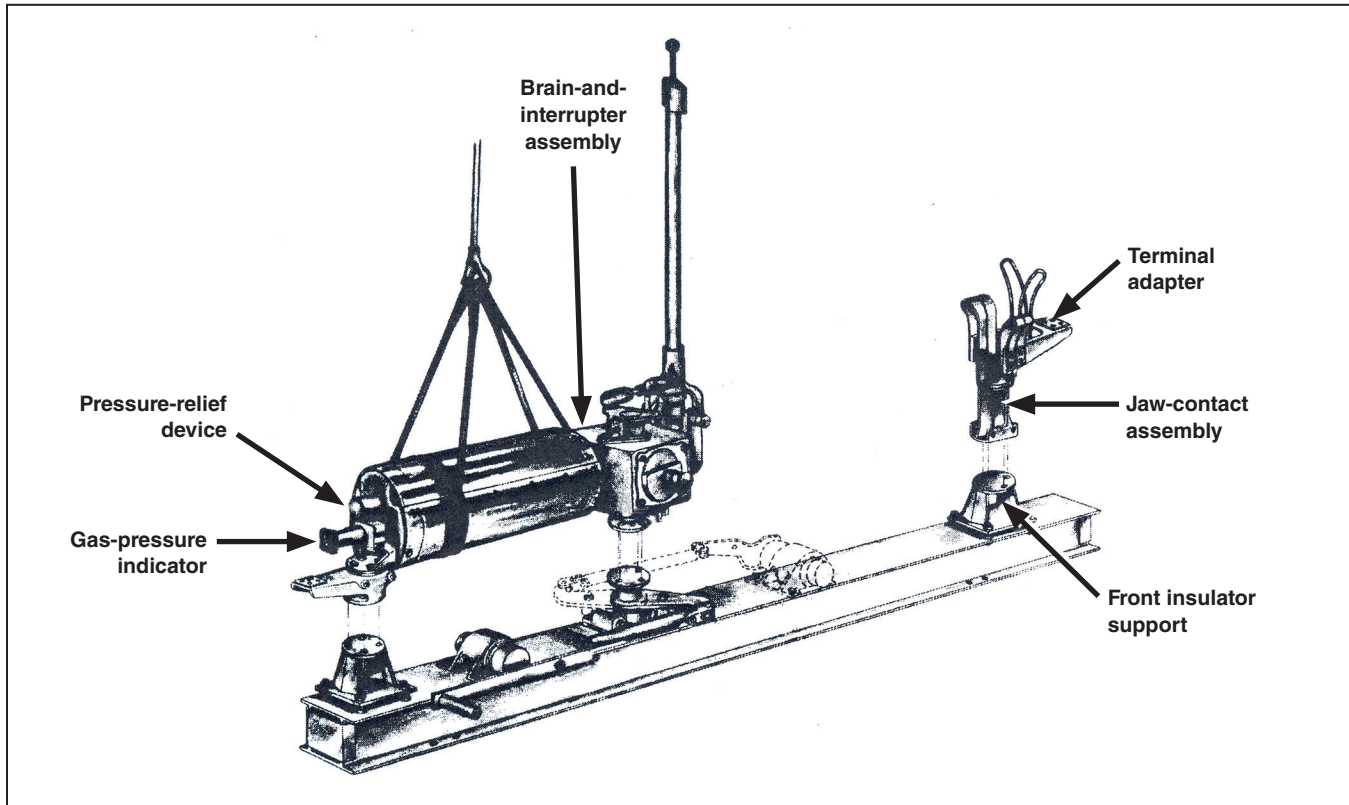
Removing brain-and-interrupter assembly and the jaw-contact assembly.
